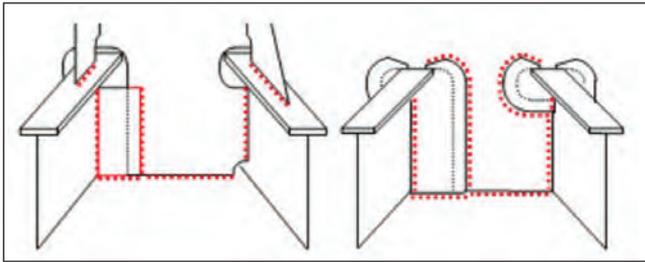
Typical application structure of welding robot in block-assembly stage
